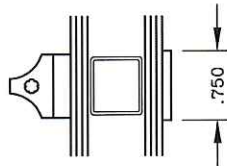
/2 Scale – For Custom Size Drawing Contact Graham
